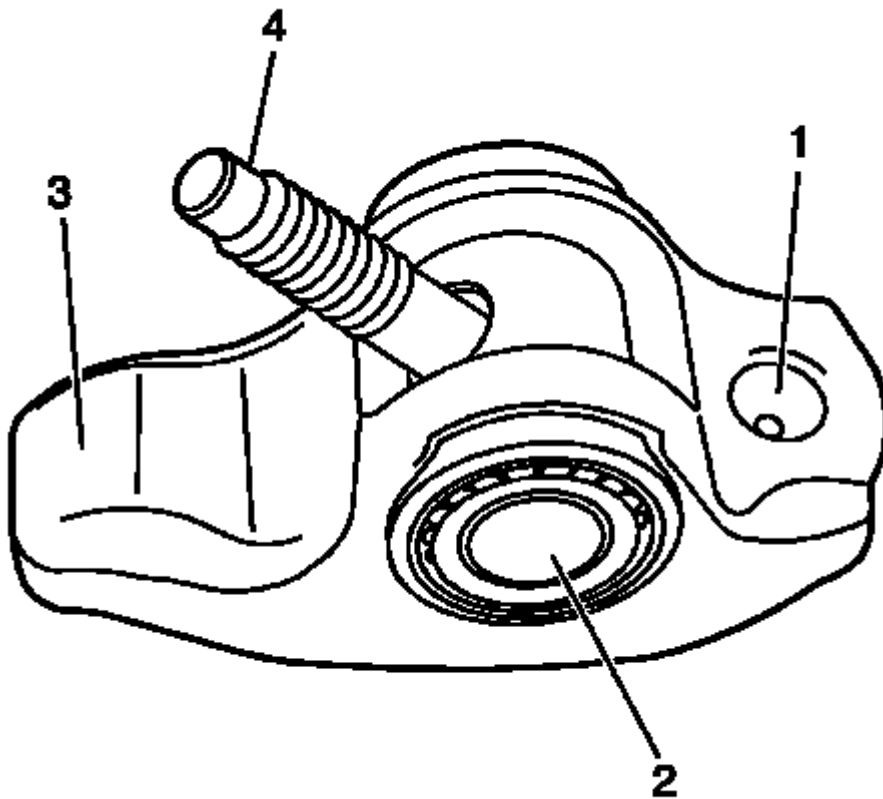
View Of Valve Pushrod Socket, Roller Pivot & Valve Stem Tip
